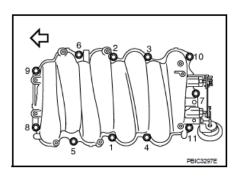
Identifying Intake Manifold Bolt Tightening Sequence (Upper) Courtesy of NISSAN MOTOR CO., U.S.A.
